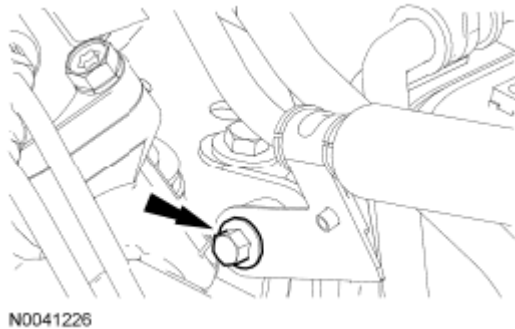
Locating Power Steering Pressure Hose Bracket Bolt
